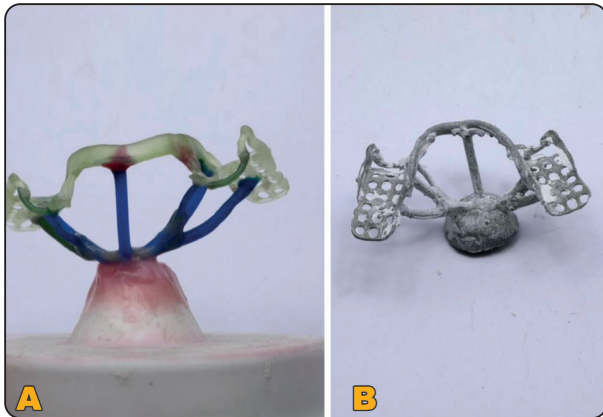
a) Sprue attached to the 3D resin printed framework pattern - b) 3D resin printed framework after casting process
